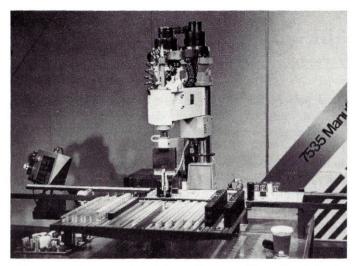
The IBM pick and place robot assembling printed circuit boards.
